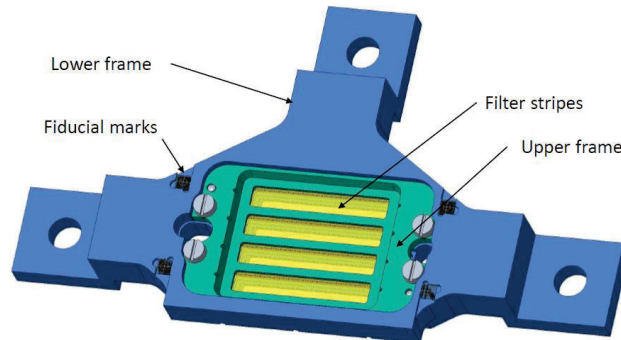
design of DPF-SWIR filter assembly (isometric view)
